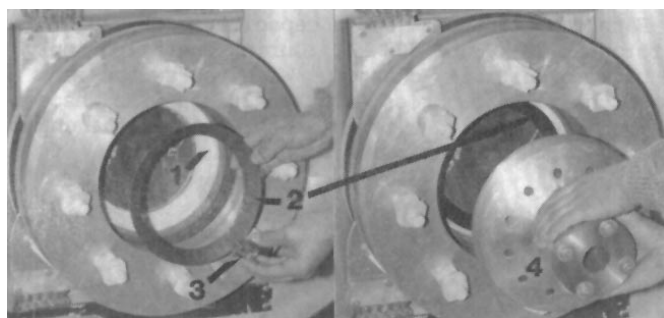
Photos showing the different components of the drive-coil assembly: (1) the drive-coil, (2) the ring, (3) the slug projectile, and (4) the barrel.
